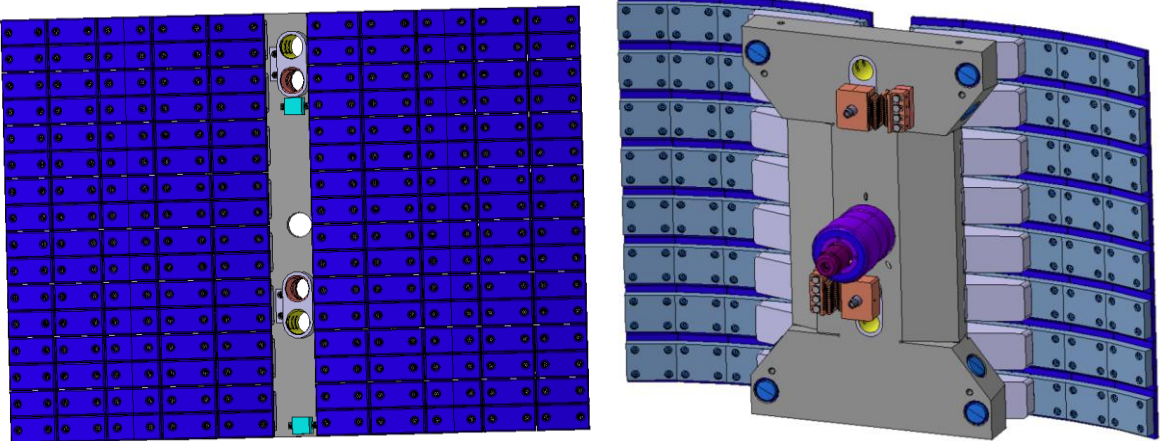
Detailed model of Temporary First Wall 04 panel.
